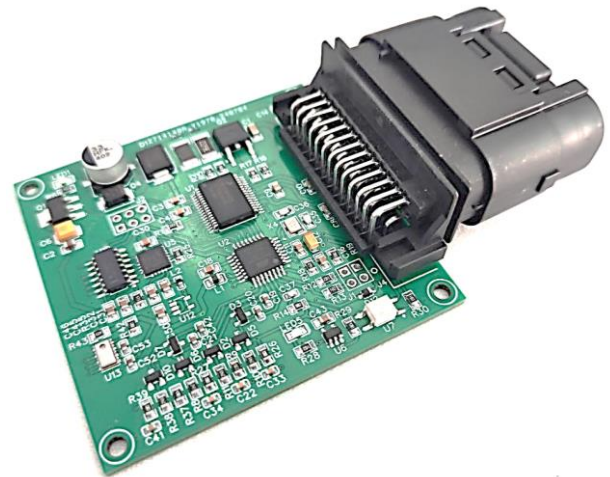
External view of the developed printed circuit board design for the fuel injection control unit
